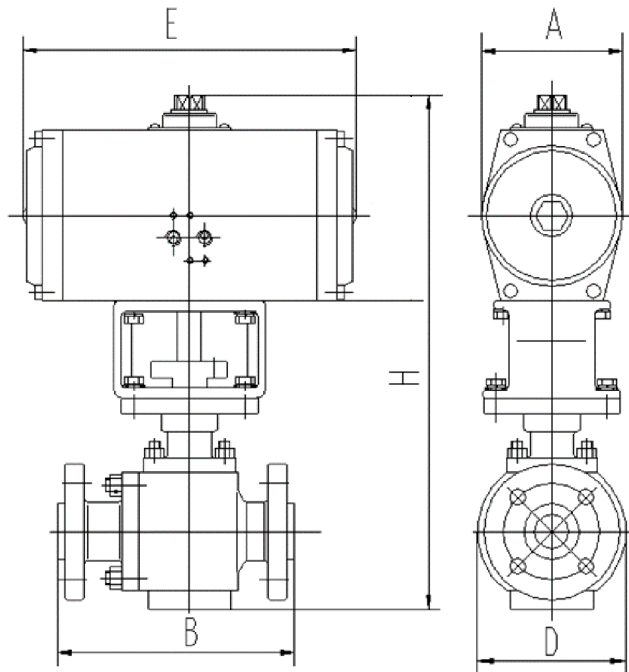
Overall drawing without handwheel For 1/2" DN15~4"DN100
